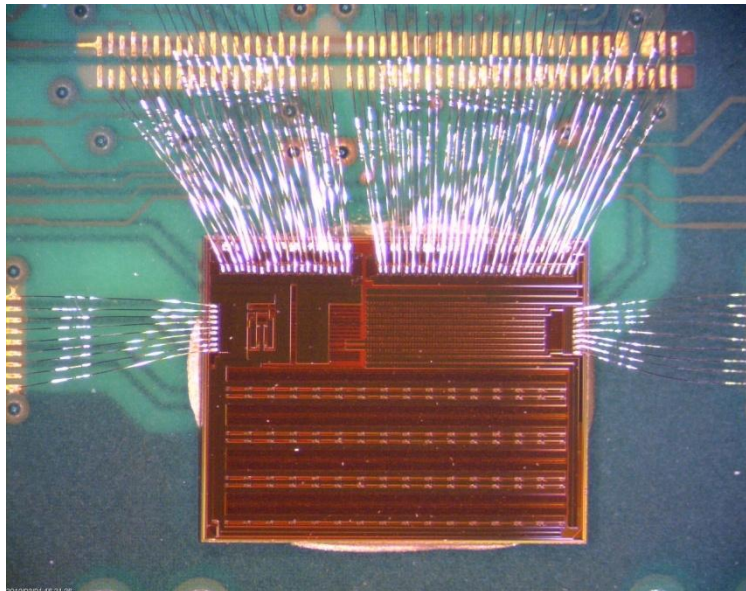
Picture of the p-TDC ASIC prototype wire bonded to the test printed circuit board
